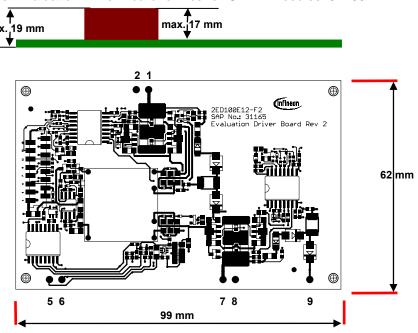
Dimensions of the 2ED100E12-F2 Driver Board
